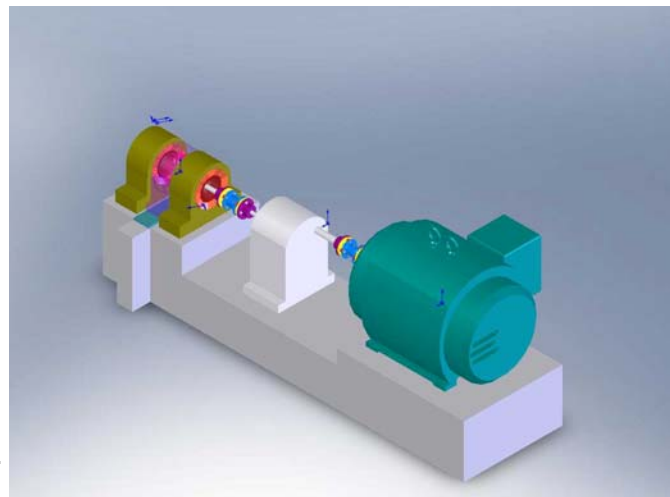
Perspective View of Fluid Film Bearing Test Rig
